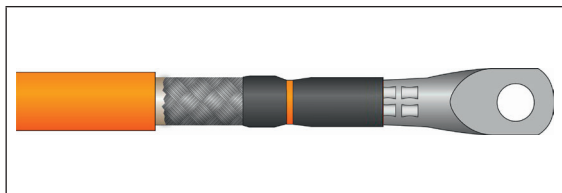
Step 7: Sliding the heat-shrink tubing over the cable and attaching the ring terminal
